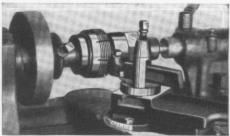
Cutting a Screw Thread on a Bearing Retaining Collar
